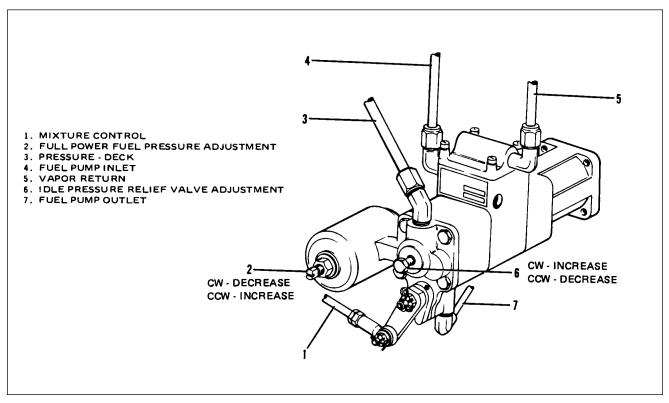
Sectional View of Altitude Compensating Fuel Pump Assembly
